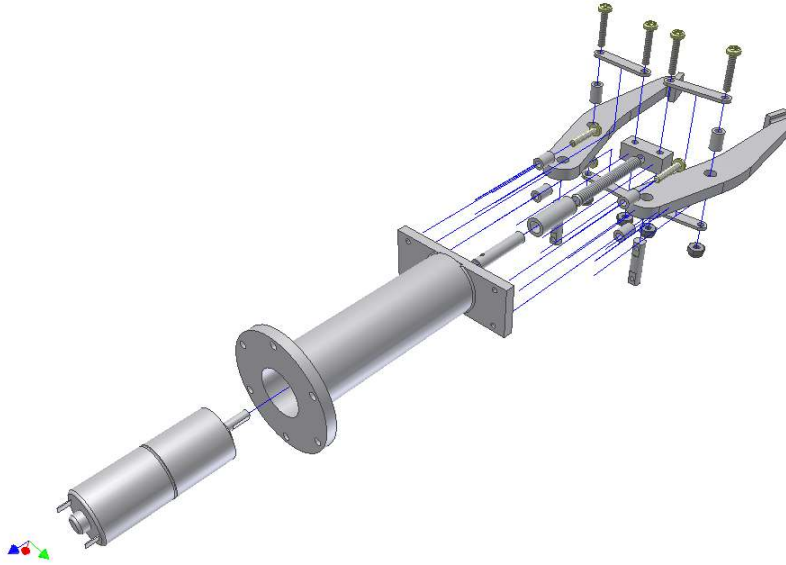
Manipulator Arm Claw and Wrist Exploded View
